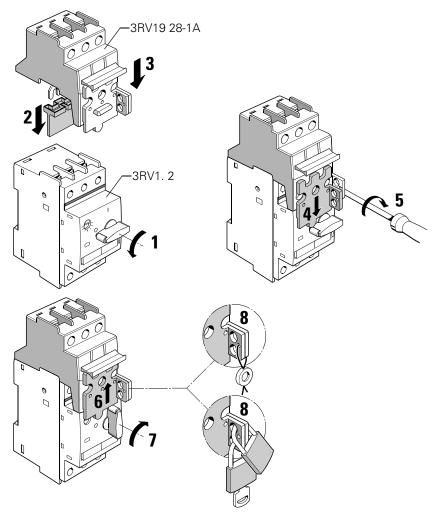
Mounting the disconnecting module (frame size S0)
